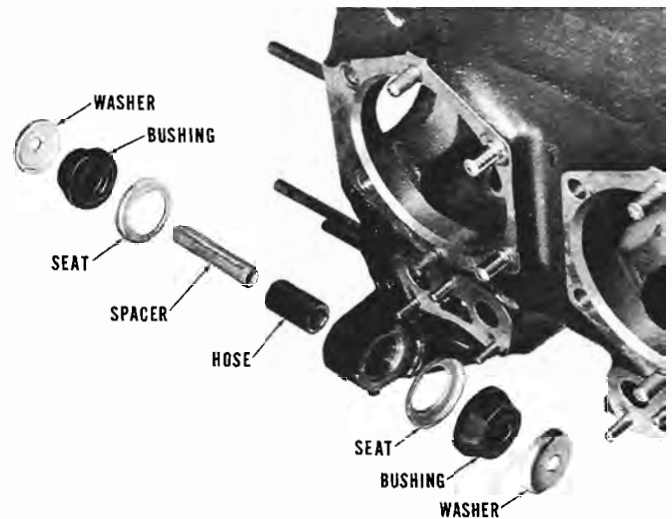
Engine Mounting Equipment of Models C90-14, -16 and O-200.
